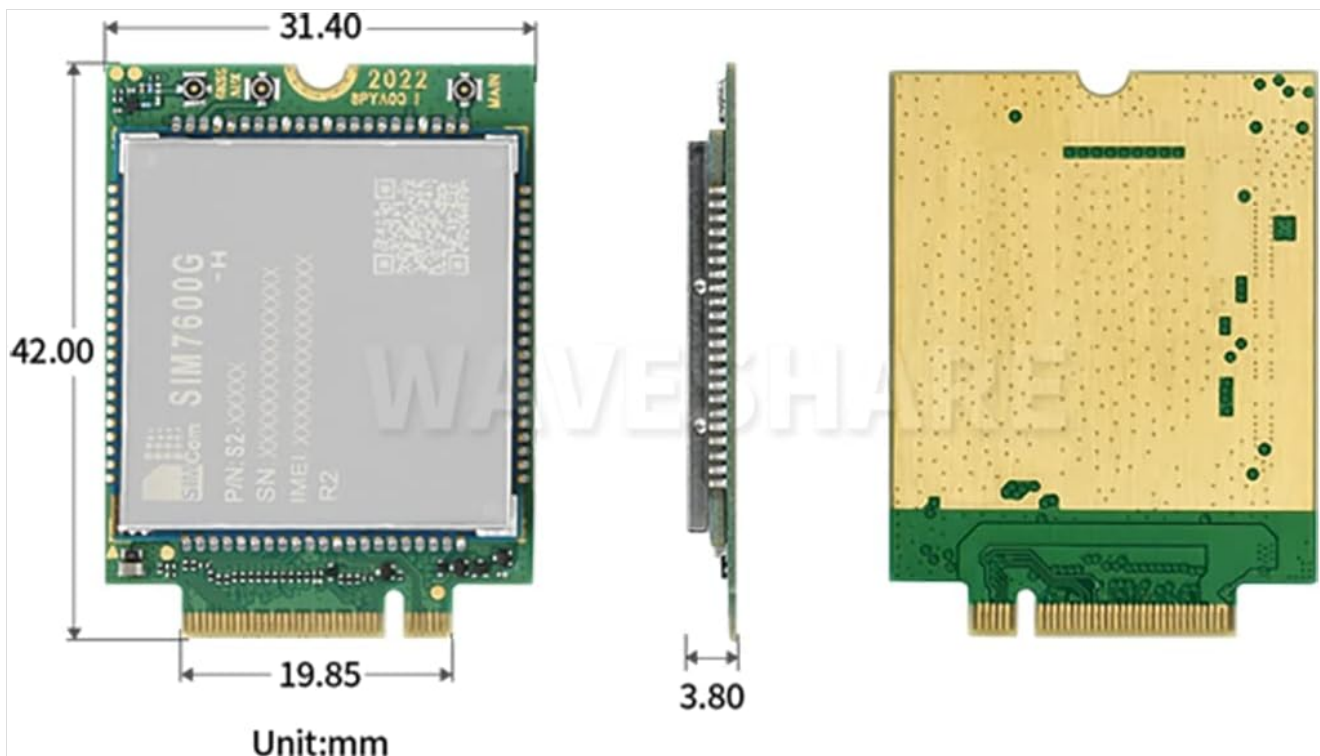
Dimensional drawing of the SIM7600G-H-M.2 module, indicating its length (42.0mm), width (31.4mm), and thickness (3.8mm).
